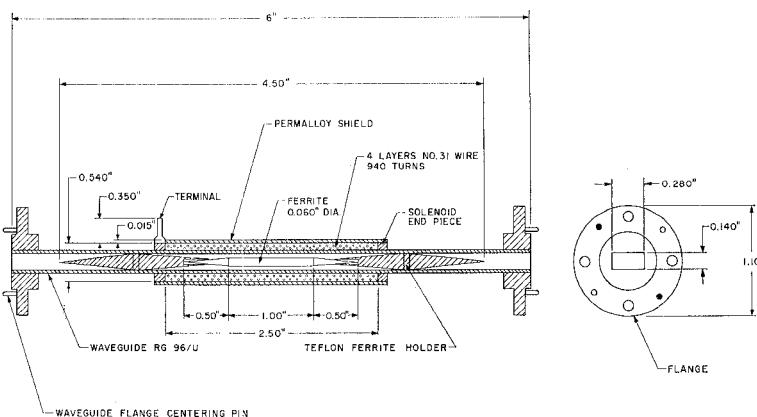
Assembly drawing of the K_a -band phase shifter.
